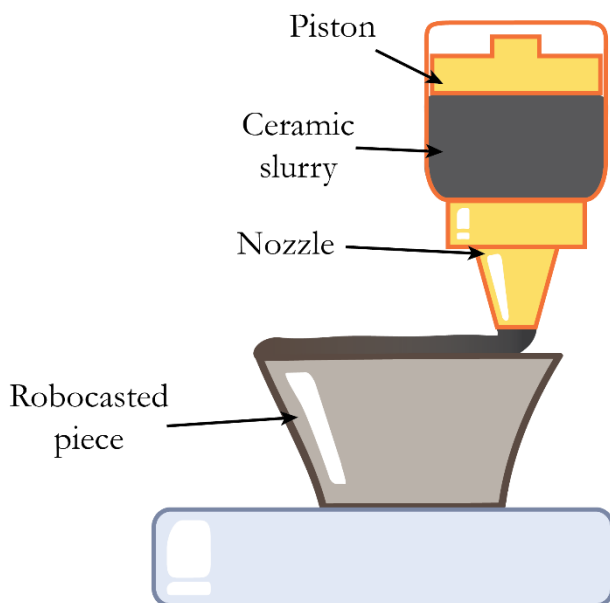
Schematic representation the robocasting printing process. One can notice the piston which presses the ink out of the nozzle. The piece is printed layer by layer with the nozzle which moves in the x, y plane.
